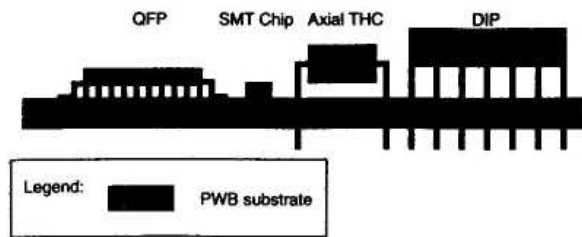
Type 1C assembly (single-sided mixed technology SMT)
